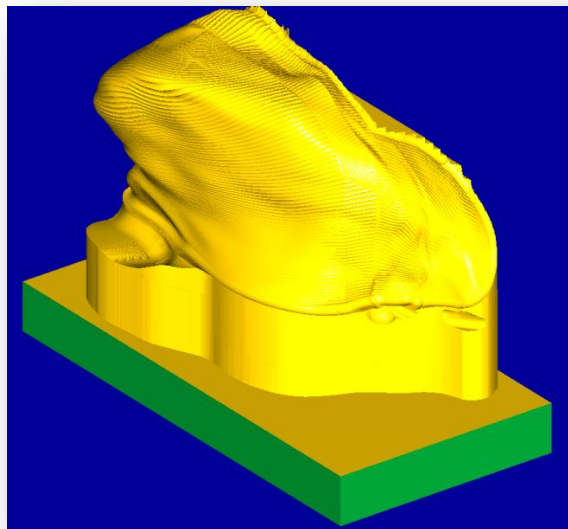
Simulated implant shape after the machining process in section 4.2.5
